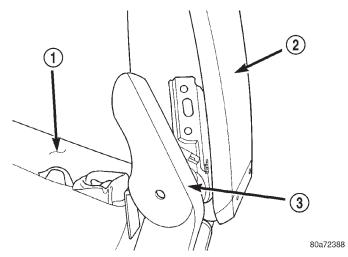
Armrest/Console Inertia Latch Hinge Cover
